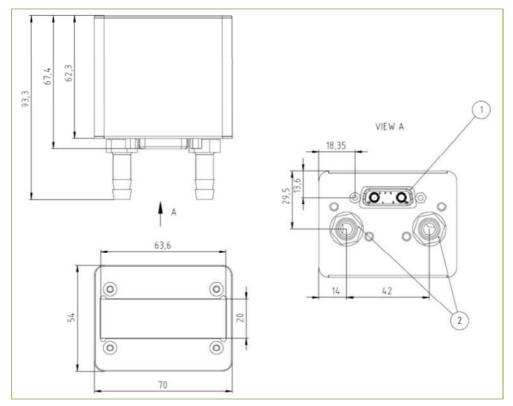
Dimensions in mm of a single 60 mm module. (1) Electrical connector (2) Water connectors
